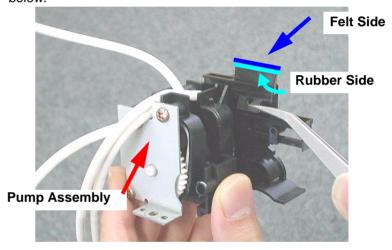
Fig. 4-90 Assembling the Head Cleaner
